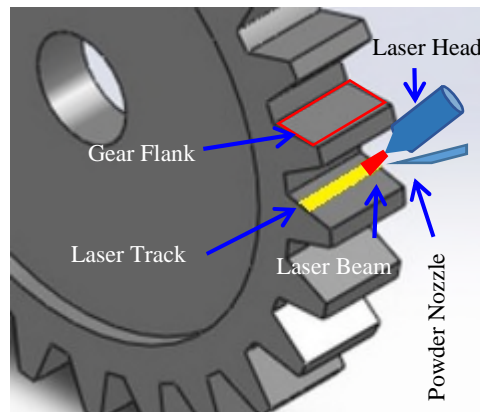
Sketch map for laser cladding on heavy duty spur gear flank.
